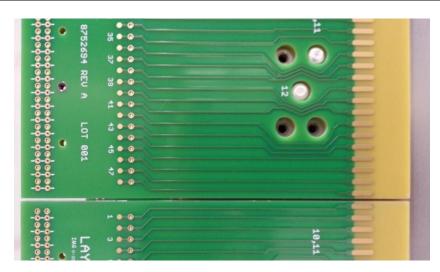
(2) X – Head Boards attached to the APA. Solder pads are facing the Foot End of the APA, and there is a small gap seen between the boards when positioned correctly on the APA. Each pattern of screw holes should have (2) screws attached for this level.
